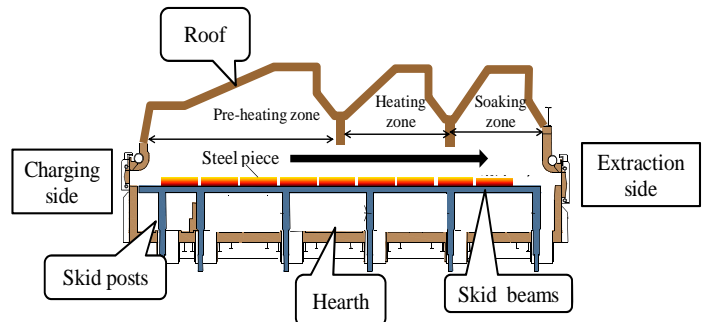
Cross-section schematic view of a heating/reheat furnace in a hot rolling mill
